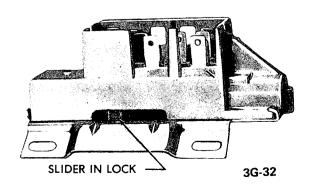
G-98 - Ignition Switch Slider in "Lock" Position
